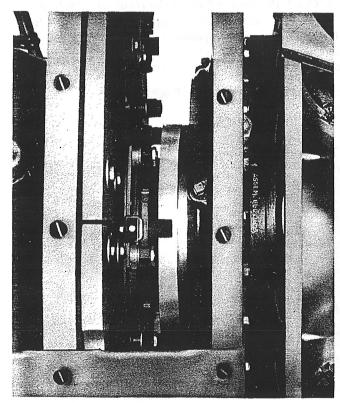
Aligning Adapter Plate Slot with Stop Assembly
